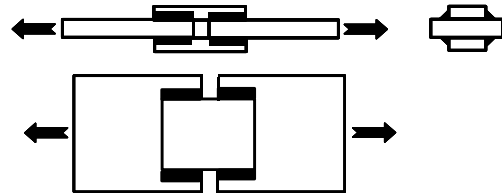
The longitudinal-fillet-weld-tension-shear specimen. Block arrows indicate loading direction.
